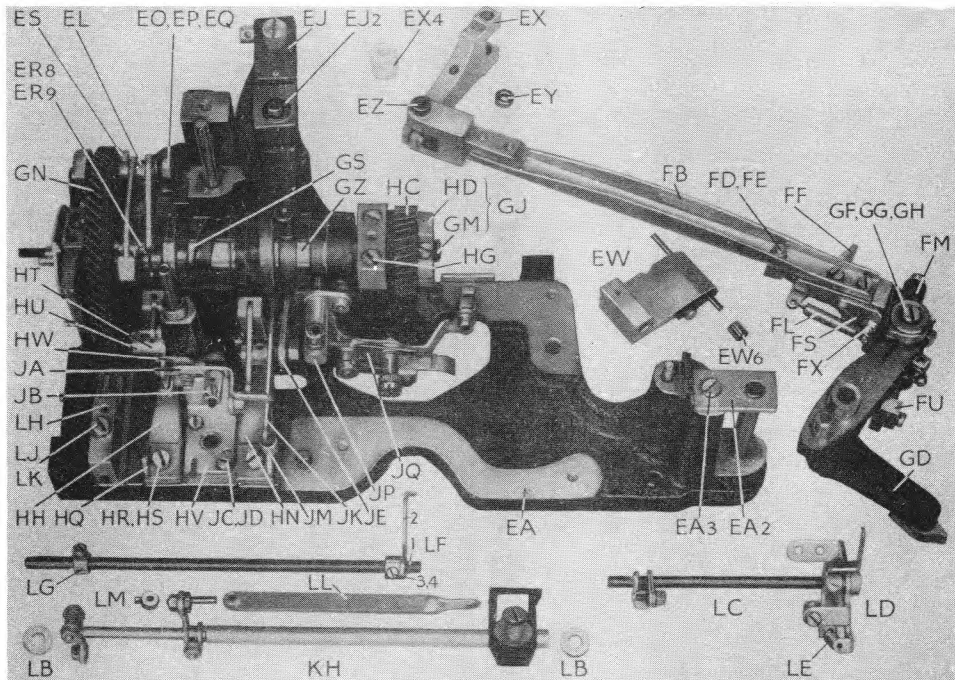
CAM UNIT PARTIAL ASSEMBLY.
